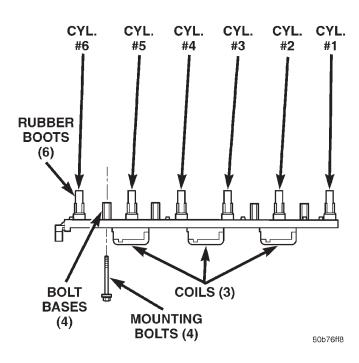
Ignition Coil Assembly—4.0L 6–Cylinder Engine
